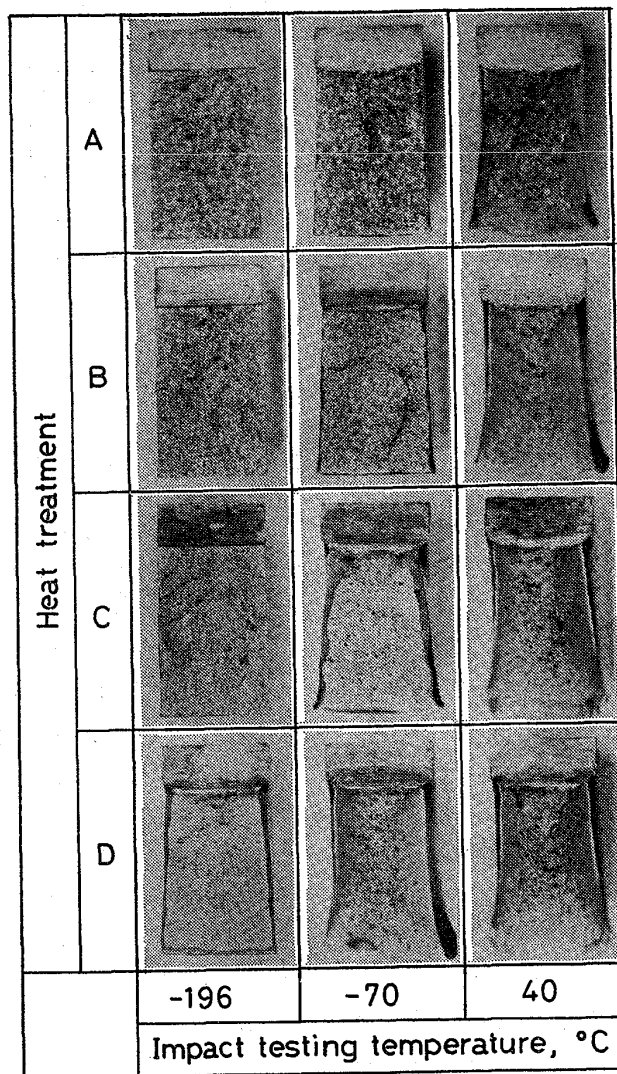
Macro-fractography of Charpy impact-tested specimens.
